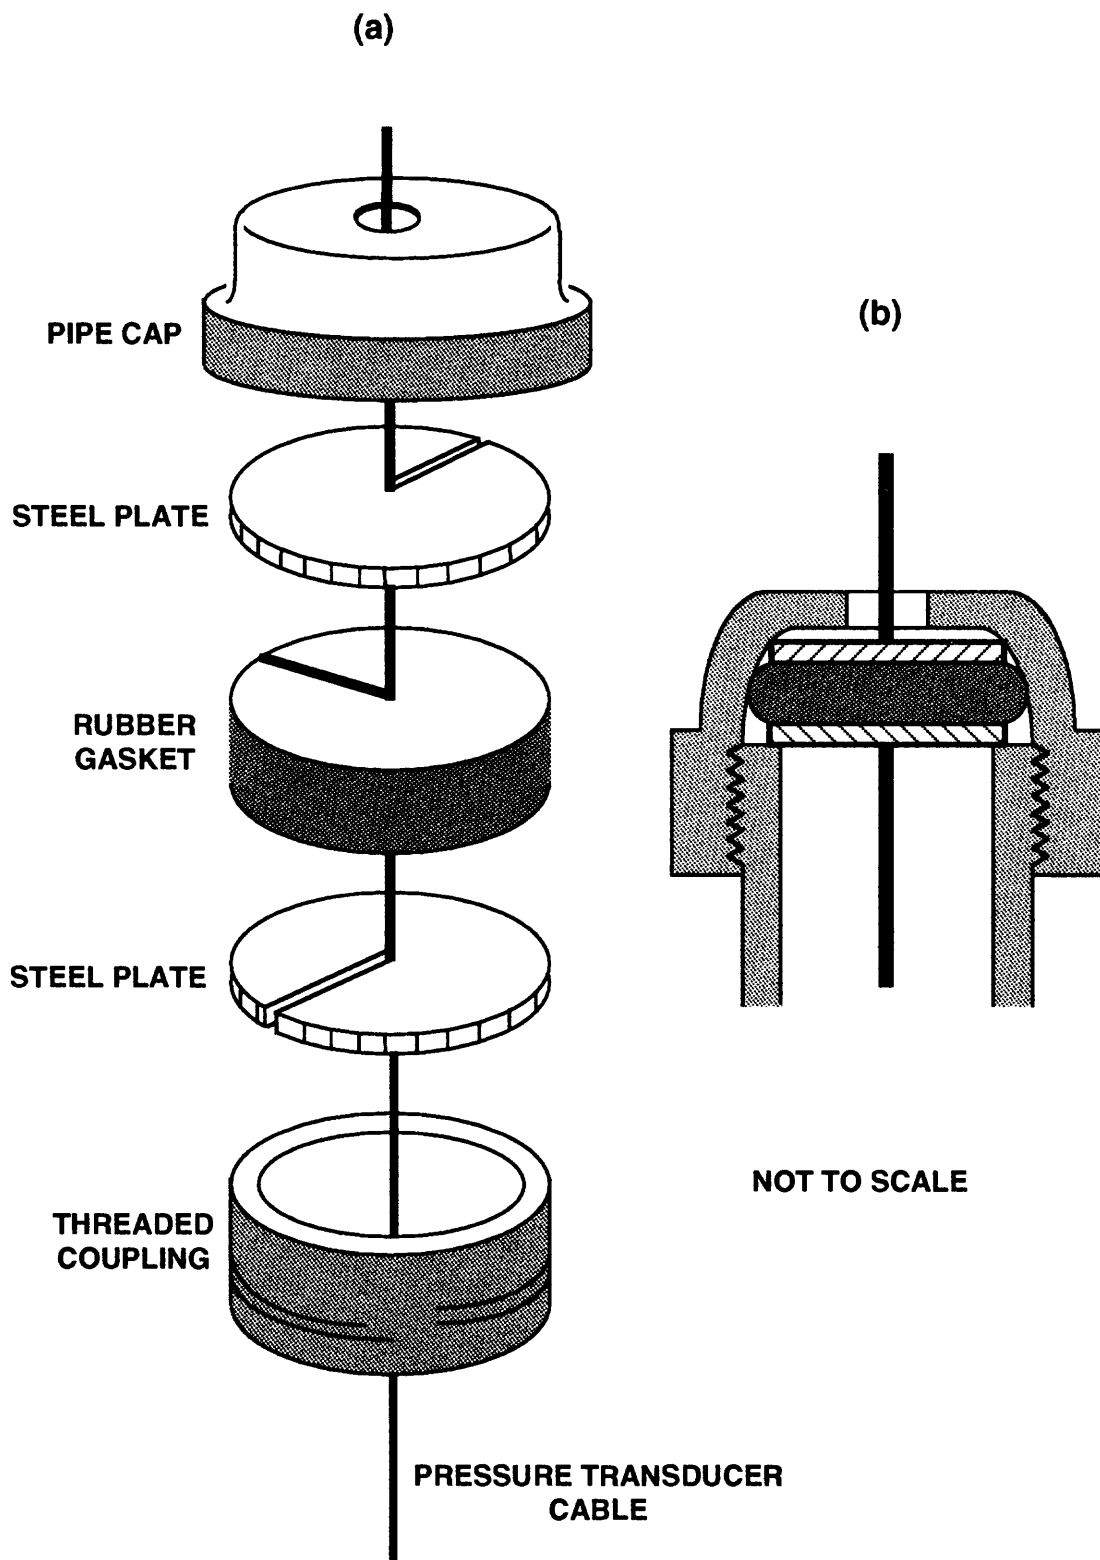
Diagram of pressure seals around a pressure transducer cable, (a) exploded view, (b) assembled view.
